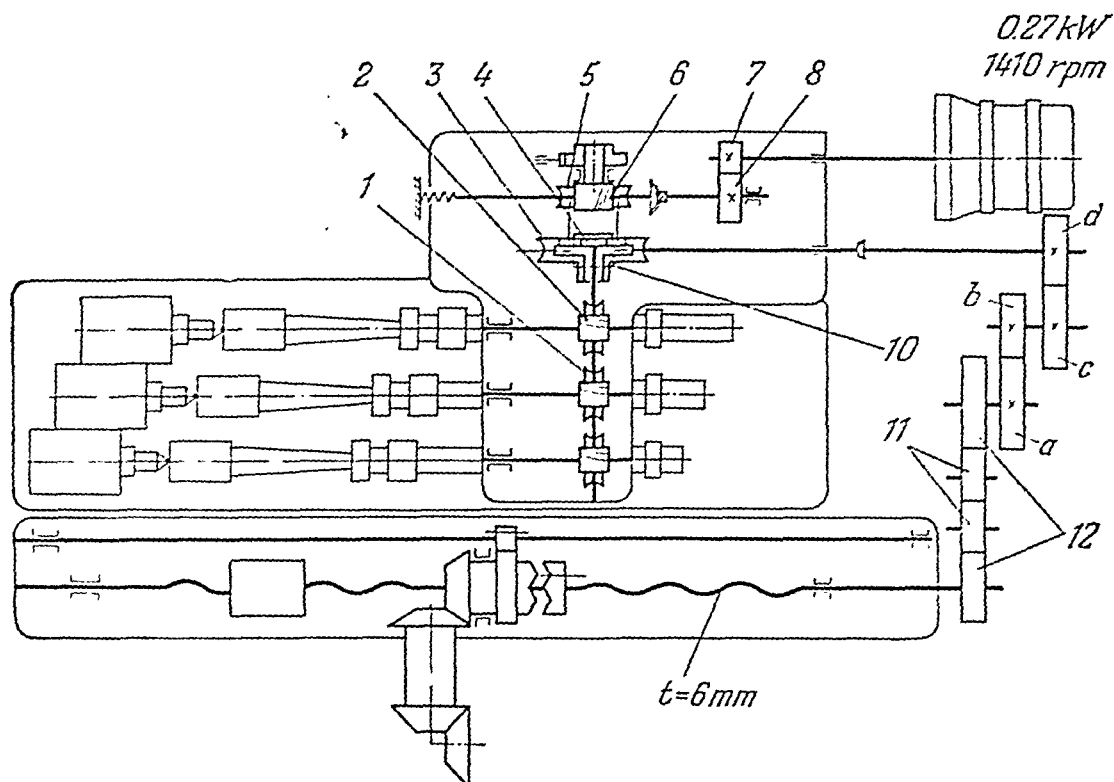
Gearing diagram of the specialized units in the model MH-10 milling machine
